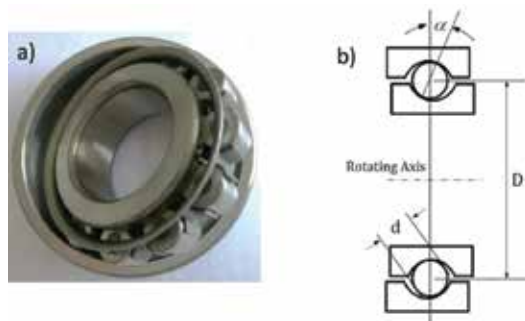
(a) A graphical illustration of a roller element bearing and (b) a cross-sectional view of the roller element bearing.
